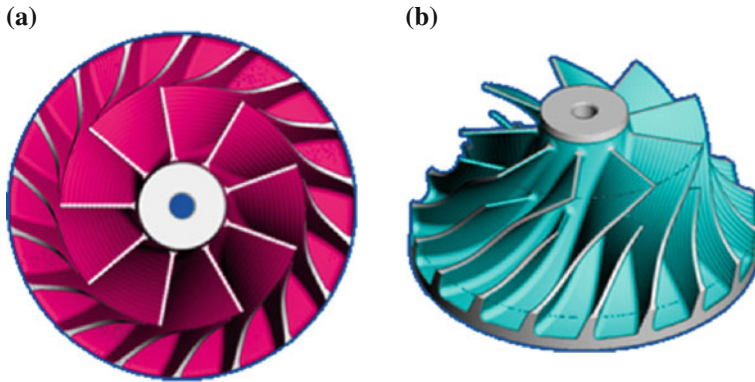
5-axis rough machining (*second stage*). a Top view. b Isometric view
